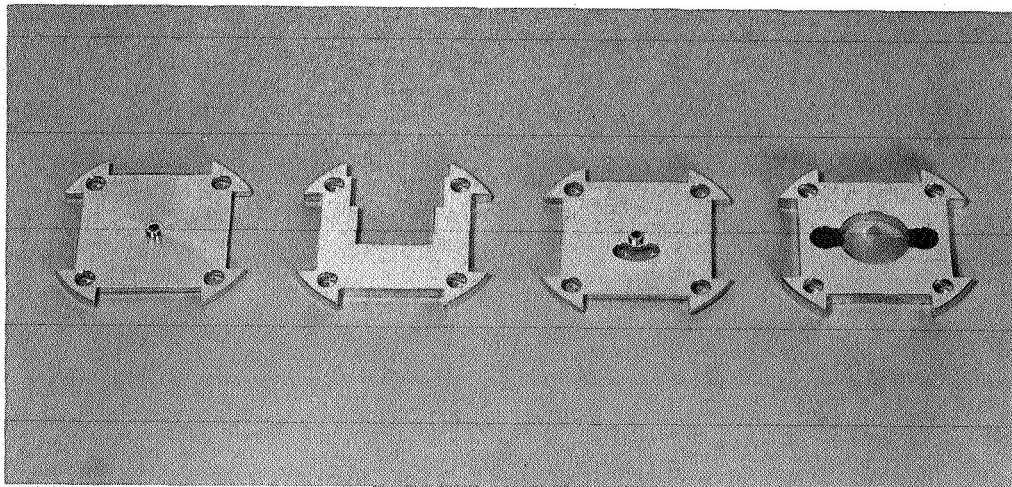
Typical waveguide coupler parts for solenoid focused coupled cavity tube.
